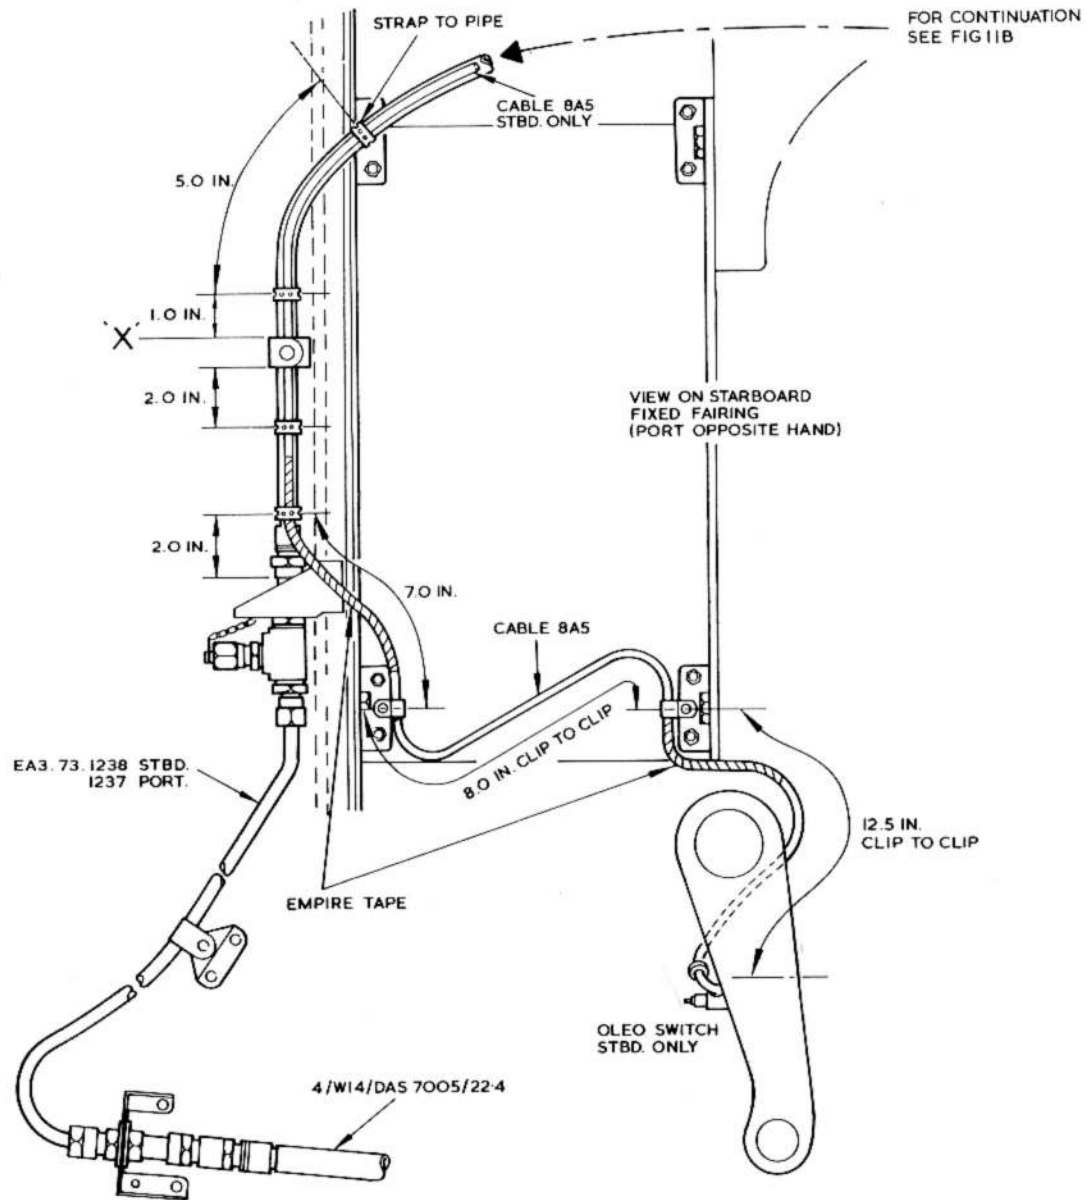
FIG. II A. UNDERCARRIAGE - PIPING AND WIRING INSTALLATION
